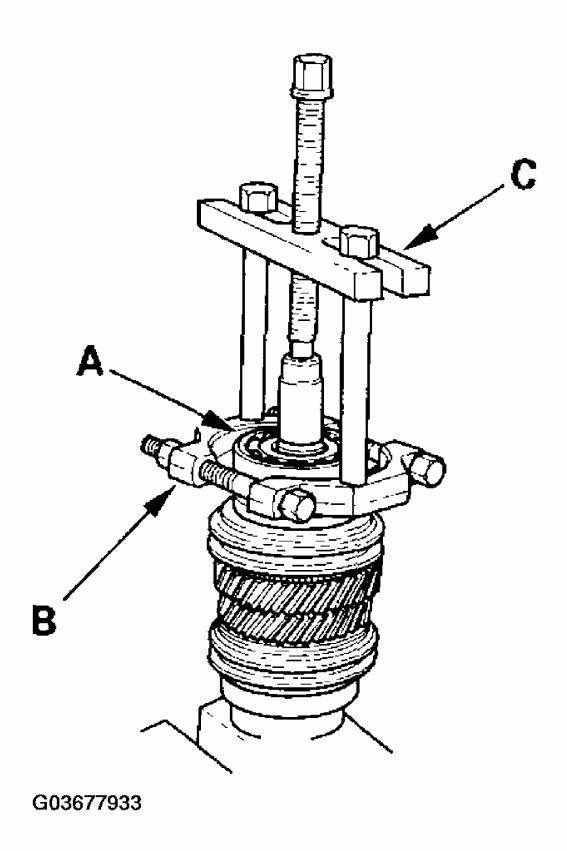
Removing Angular Ball Bearing And Tapered Cone Ring
